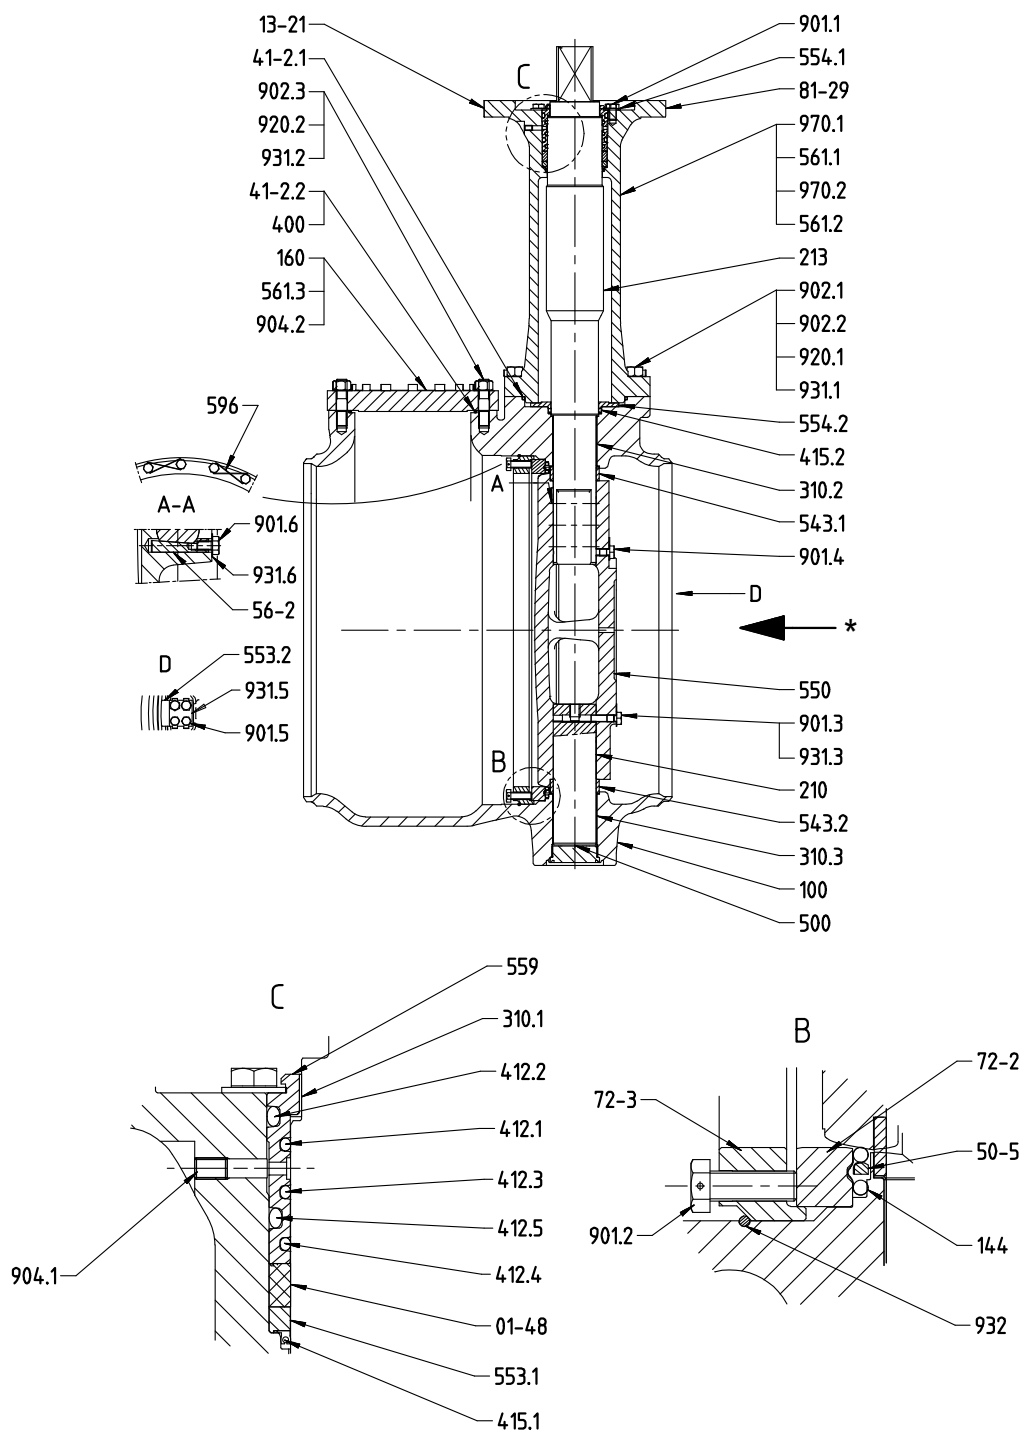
Sectional drawing of DANAIS CRYO BW - DN 650-1200 (26-48 in.)
